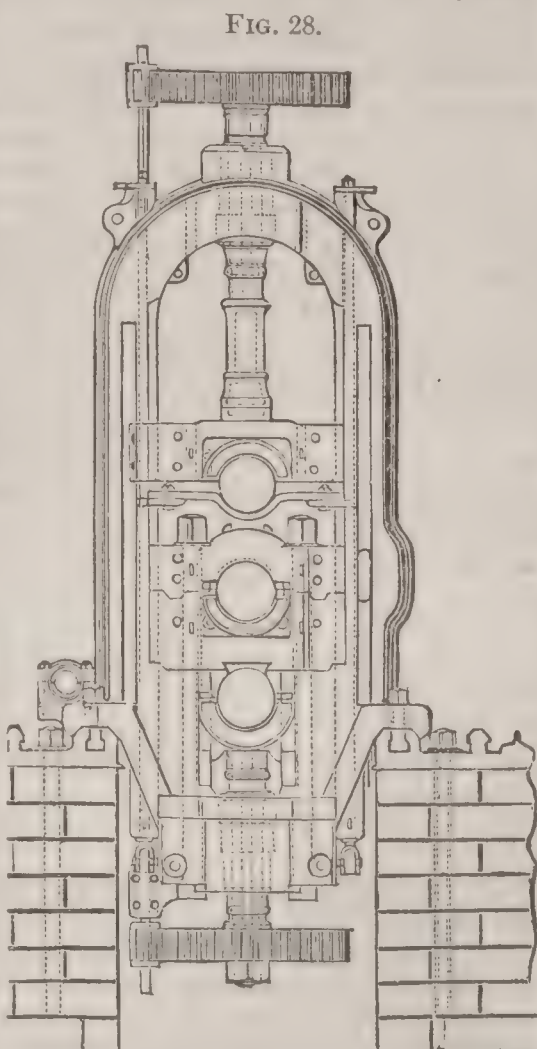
Three-high Rolling-mill, constructed from the designs of Mr. John Fritz.
